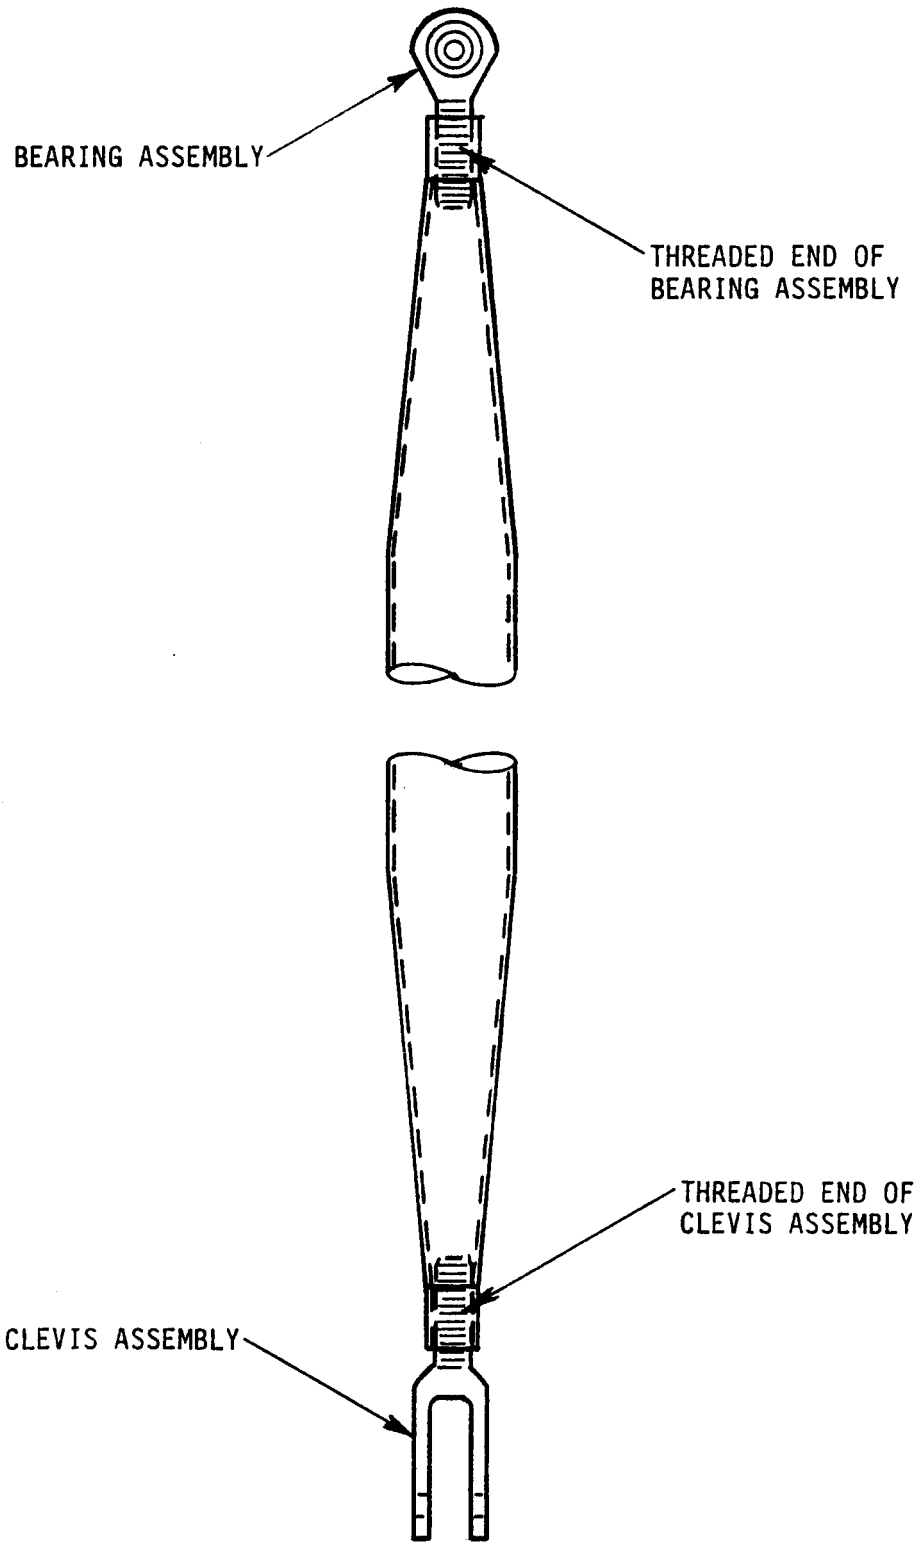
Control Rod with Bearing and Clevis Assemblies
